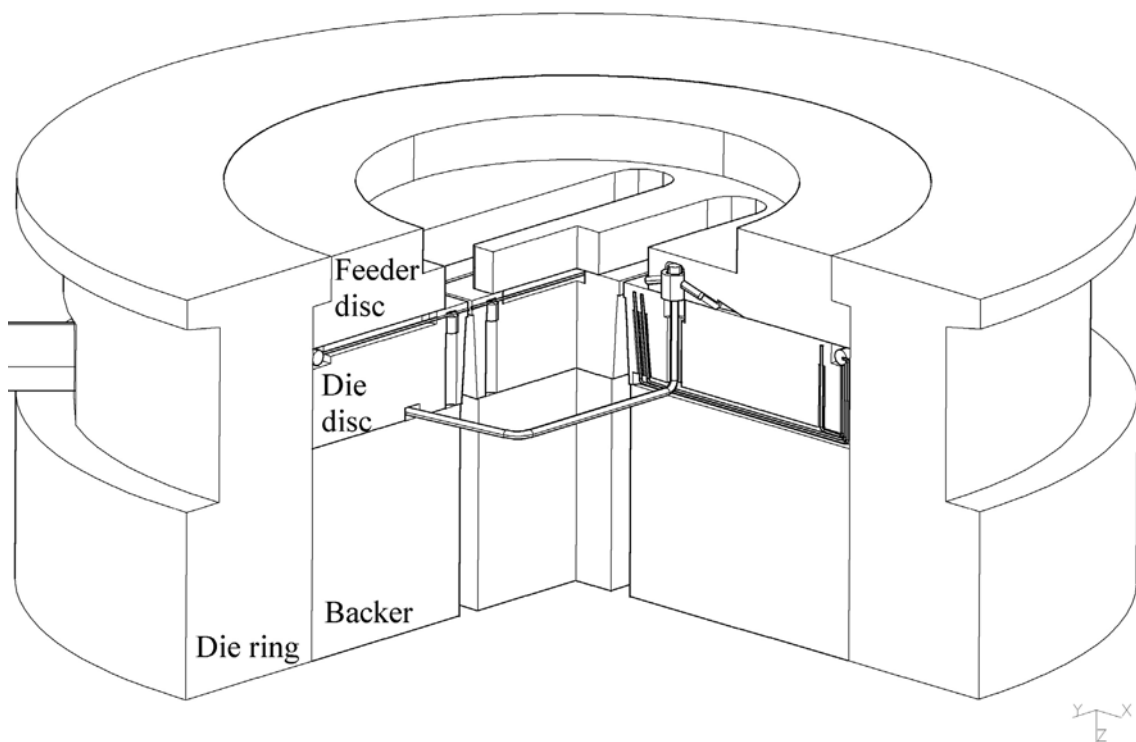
A side view of the tool stack used for industrial experiments. Only three quarters of the tool stack are shown. Thermocouples are also shown.
